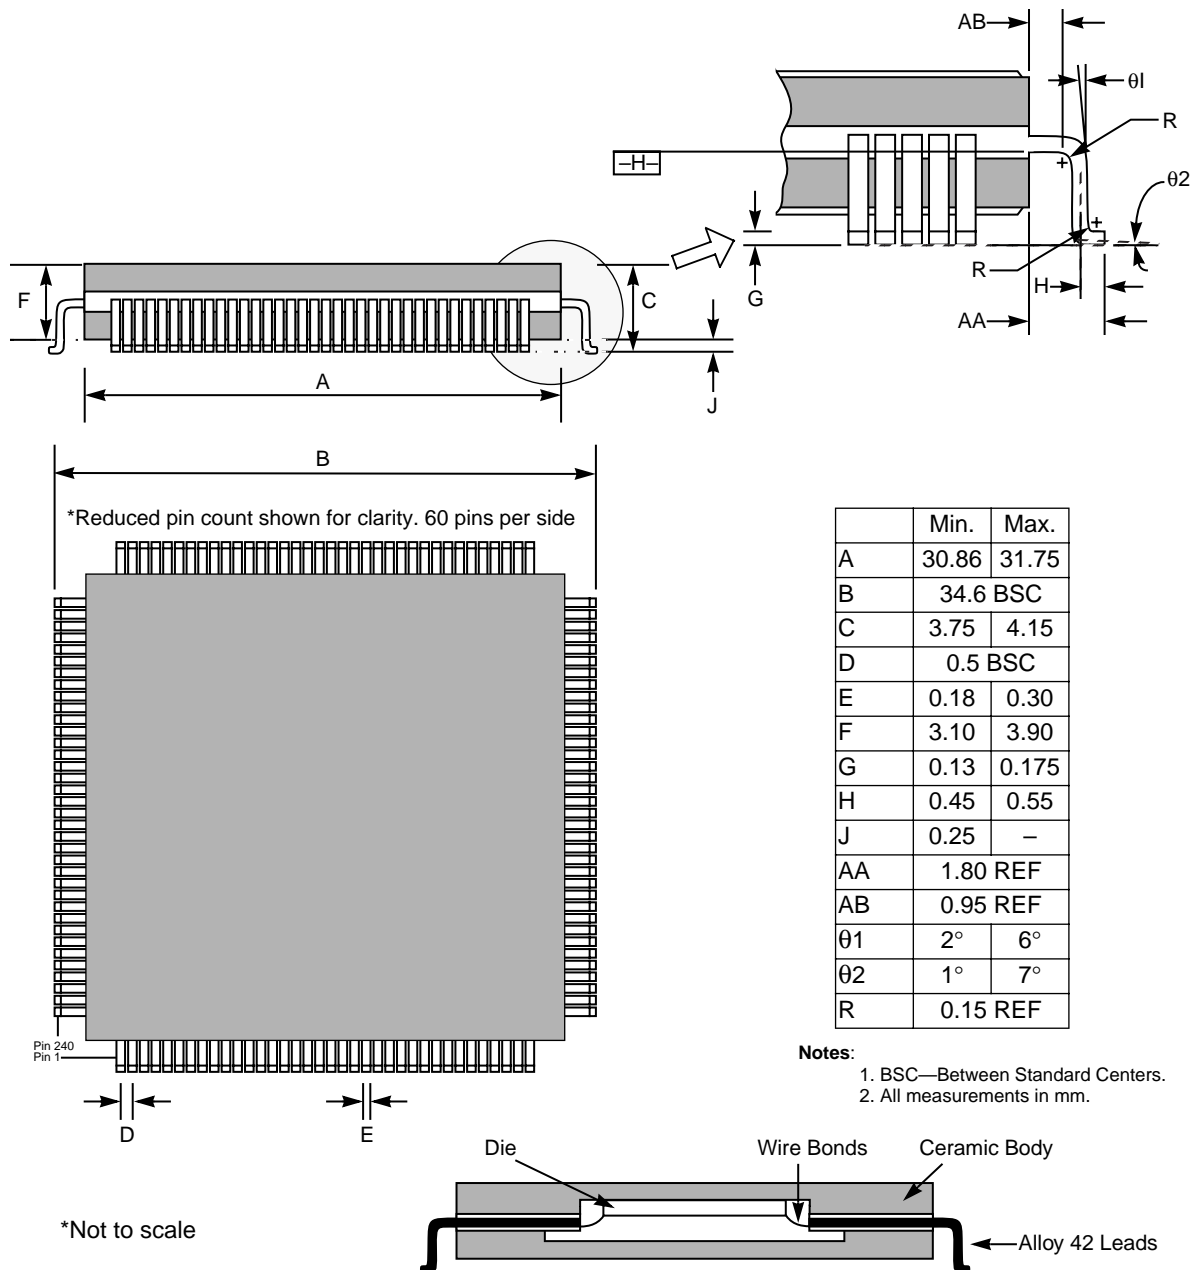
Mechanical Dimensions of the Motorola Wire-Bond CQFP Package
